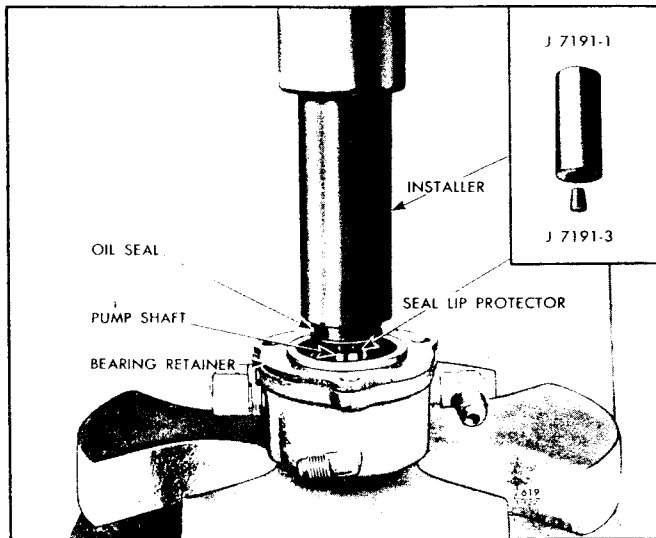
· Installing Pump Shaft Oil Seal in Bearing Retainer
